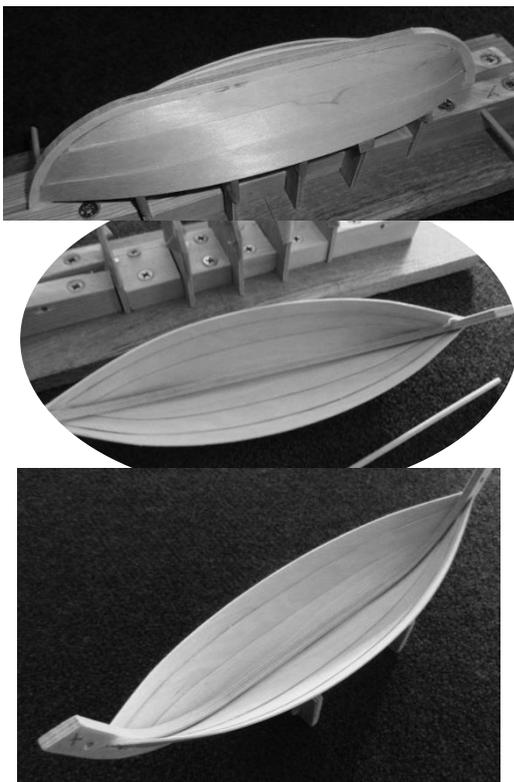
, set of views, shows the boat fully planked, then removed from the jig. Once the model is removed from the jig, the internal frames can be made and installed.
